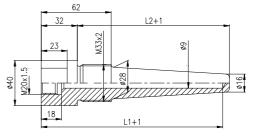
DIMENSIONAL DRAWING, TABLE OF DESIGNS AND WEIGHTS OF THERMOWELLS 1700
